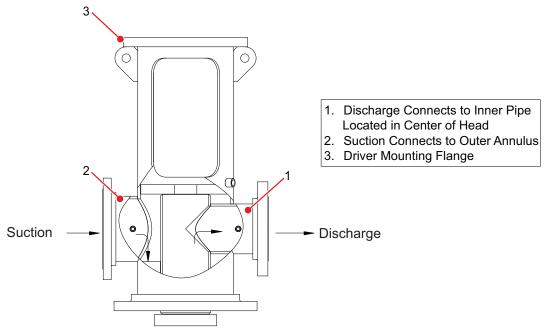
Suction and Discharge Identification - Type VC Discharge Head
